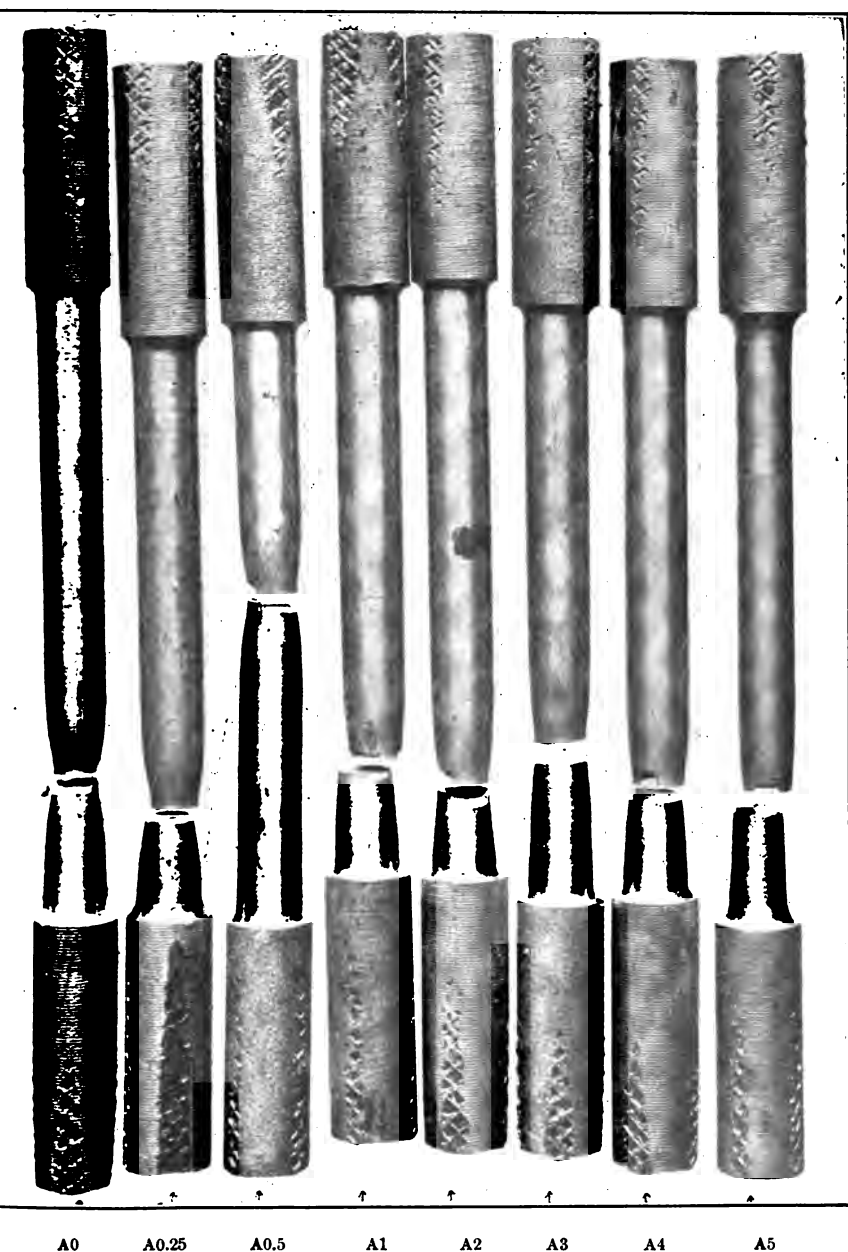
ANNEALED TEST PIECES AFTER FRACTURE.
